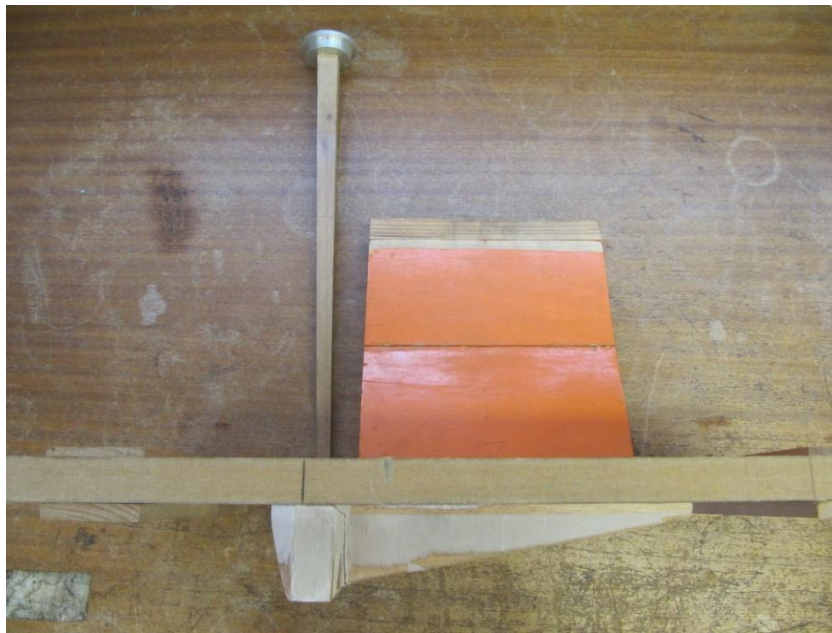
Tooling used to produce the sand moulds from which the three alloys were cast. Down sprue, runner system and mould
